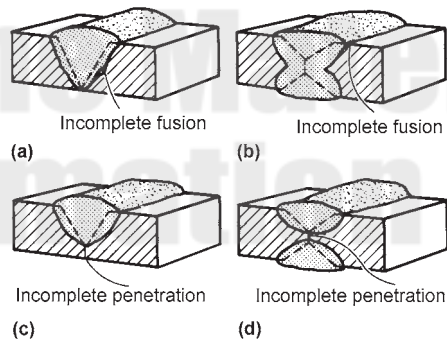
Lack of fusion in (a) a single V-groove weld and (b) double V-groove weld. Lack of penetration in (c) a single V-groove and (d) a double V-groove weld. Source: Ref 1
